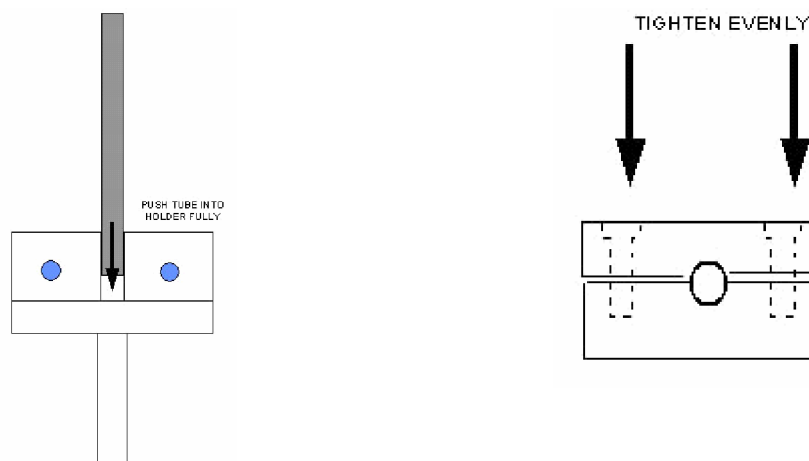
6 Inserting Wire Feed Tube into Fixed Section
